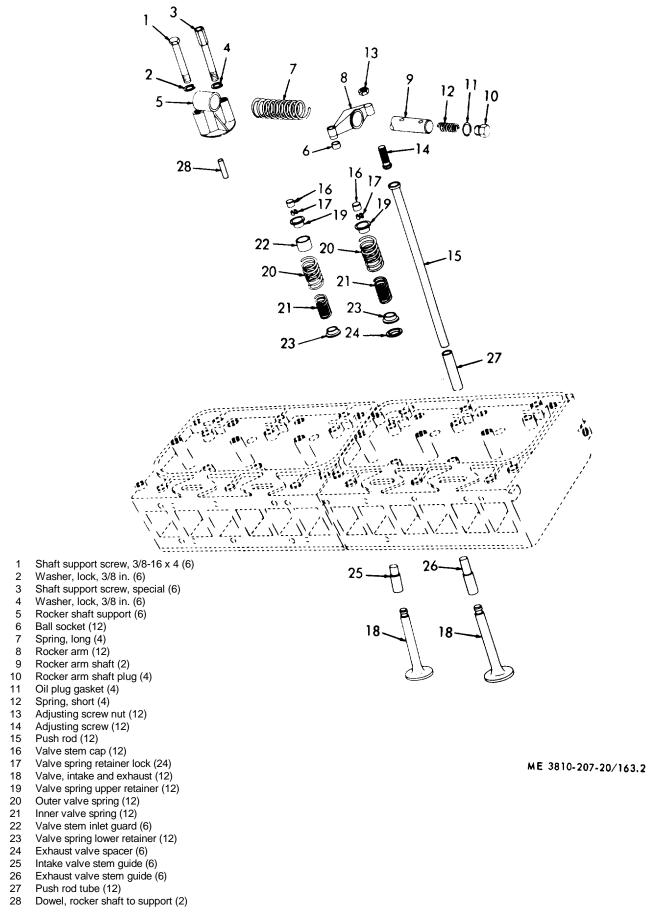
Carrier engine rocker arm and push rod assembly, exploded view.
